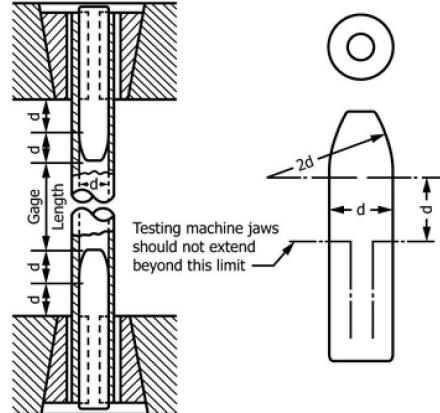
Metal Plugs for Testing Tubular Specimens, Proper Location of Plugs in Specimen and of Specimen in Heads of Testing Machine
